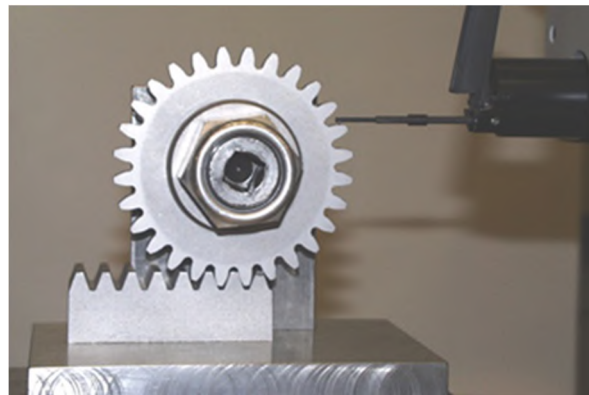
Gear mounted on a profilometer using a gear rack to locate and orient the tooth.
